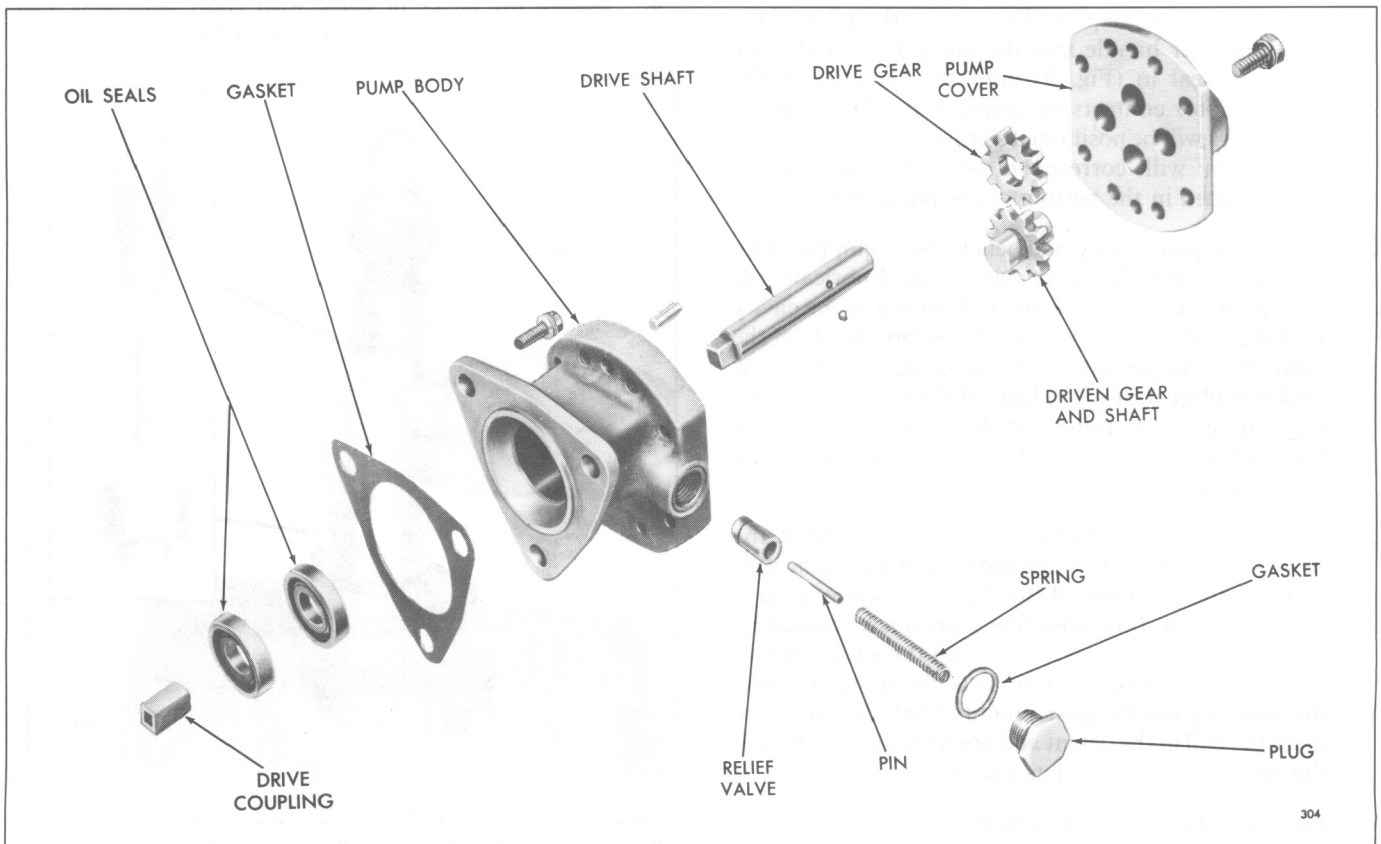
Fuel Pump Details and Relative Location of Parts
